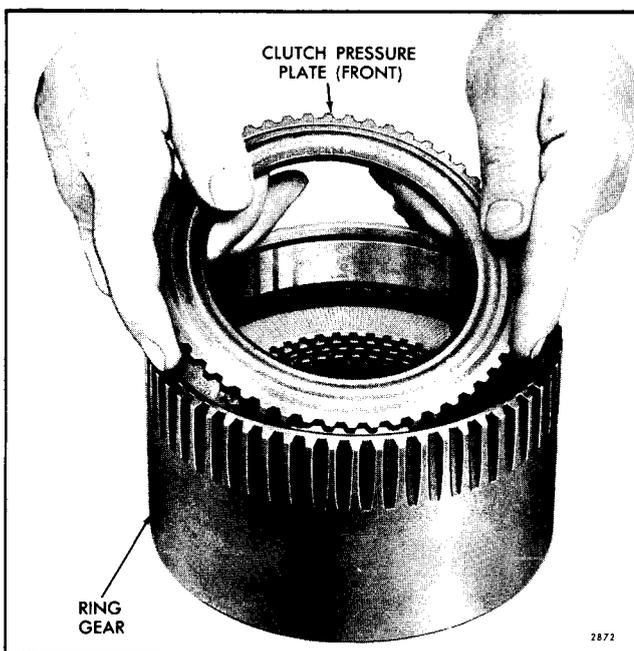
Installing Front (Forward) Clutch Pressure Plate in Ring Gear
